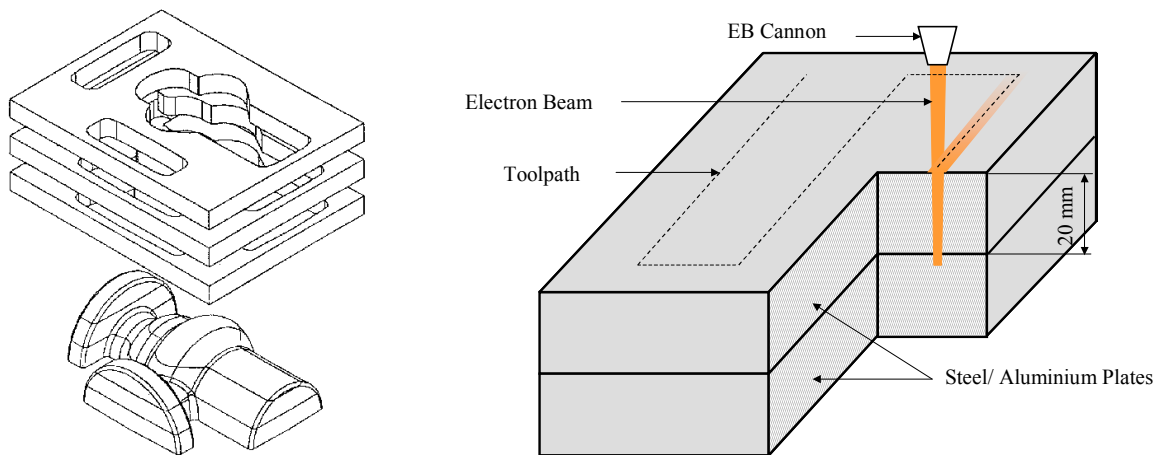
Laminated part construction at BIBA Germany by precision milling of thick plates, followed by electron beam welding.
